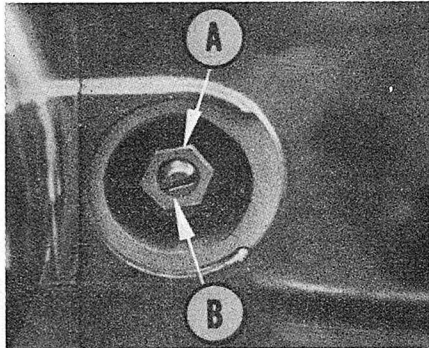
Remove cap on left side of engine to make clutch adjustment.
